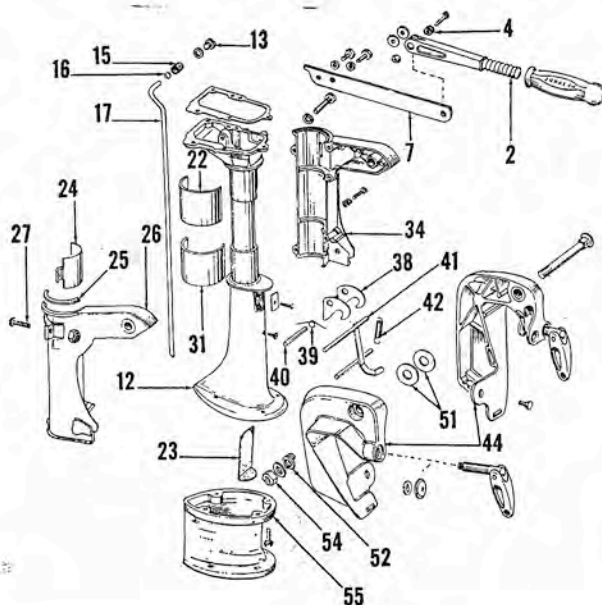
Exploded view of series JW stern bracket, drive shaft housing and associated parts. Spacer (55) is used on "Long" models.
